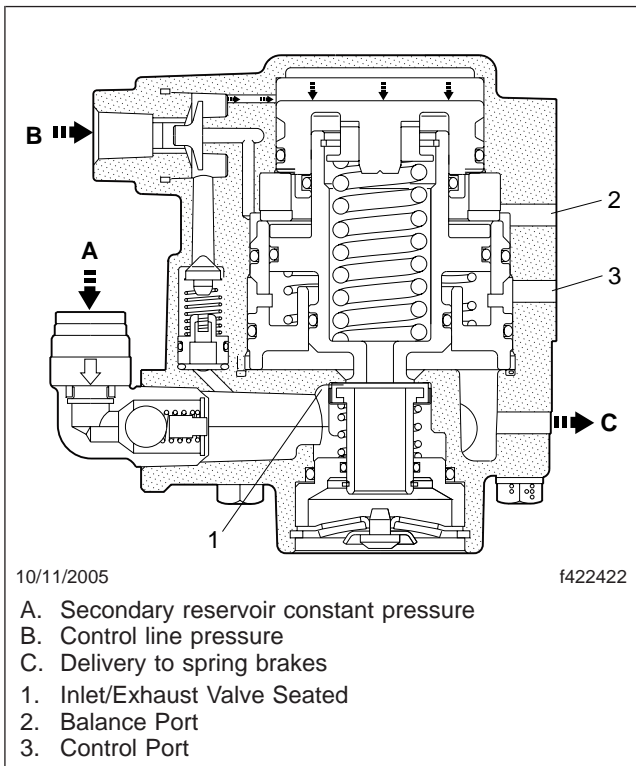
, Charging the Spring Brake Actuators Above 107 PSI
